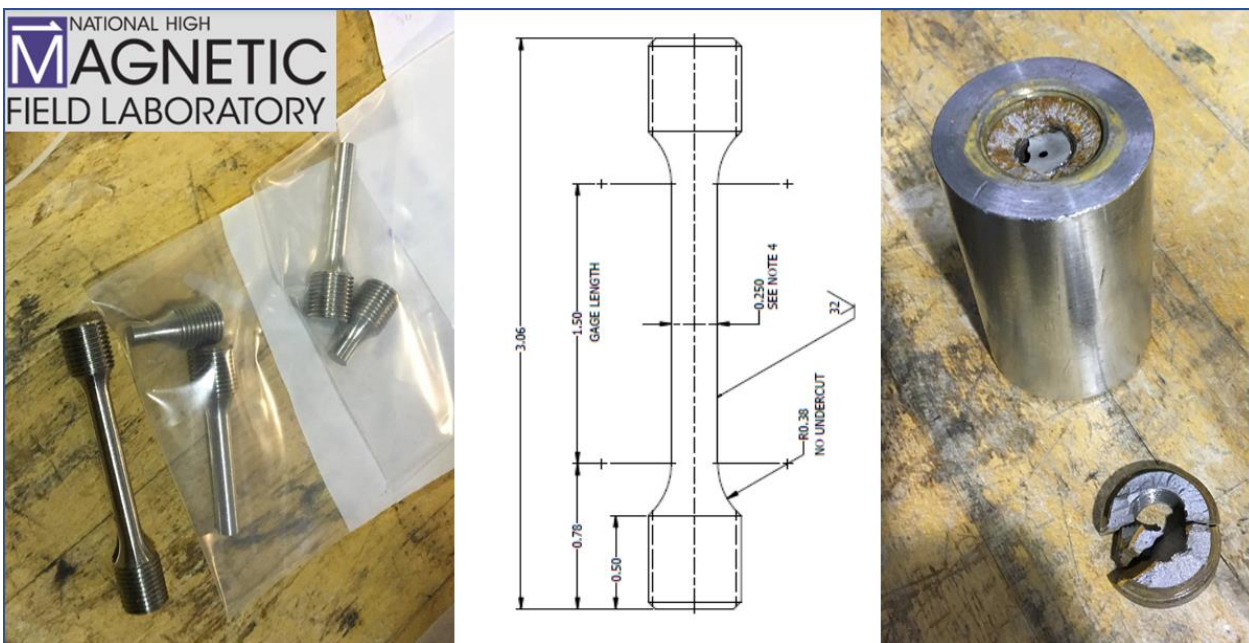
Left: Specimens for tensile tests made of Pascalloy. Center: Dimensions of the tensile specimen used for 0.5" rod material. Right: Tensile test gripper broken during test of specimen #12.
